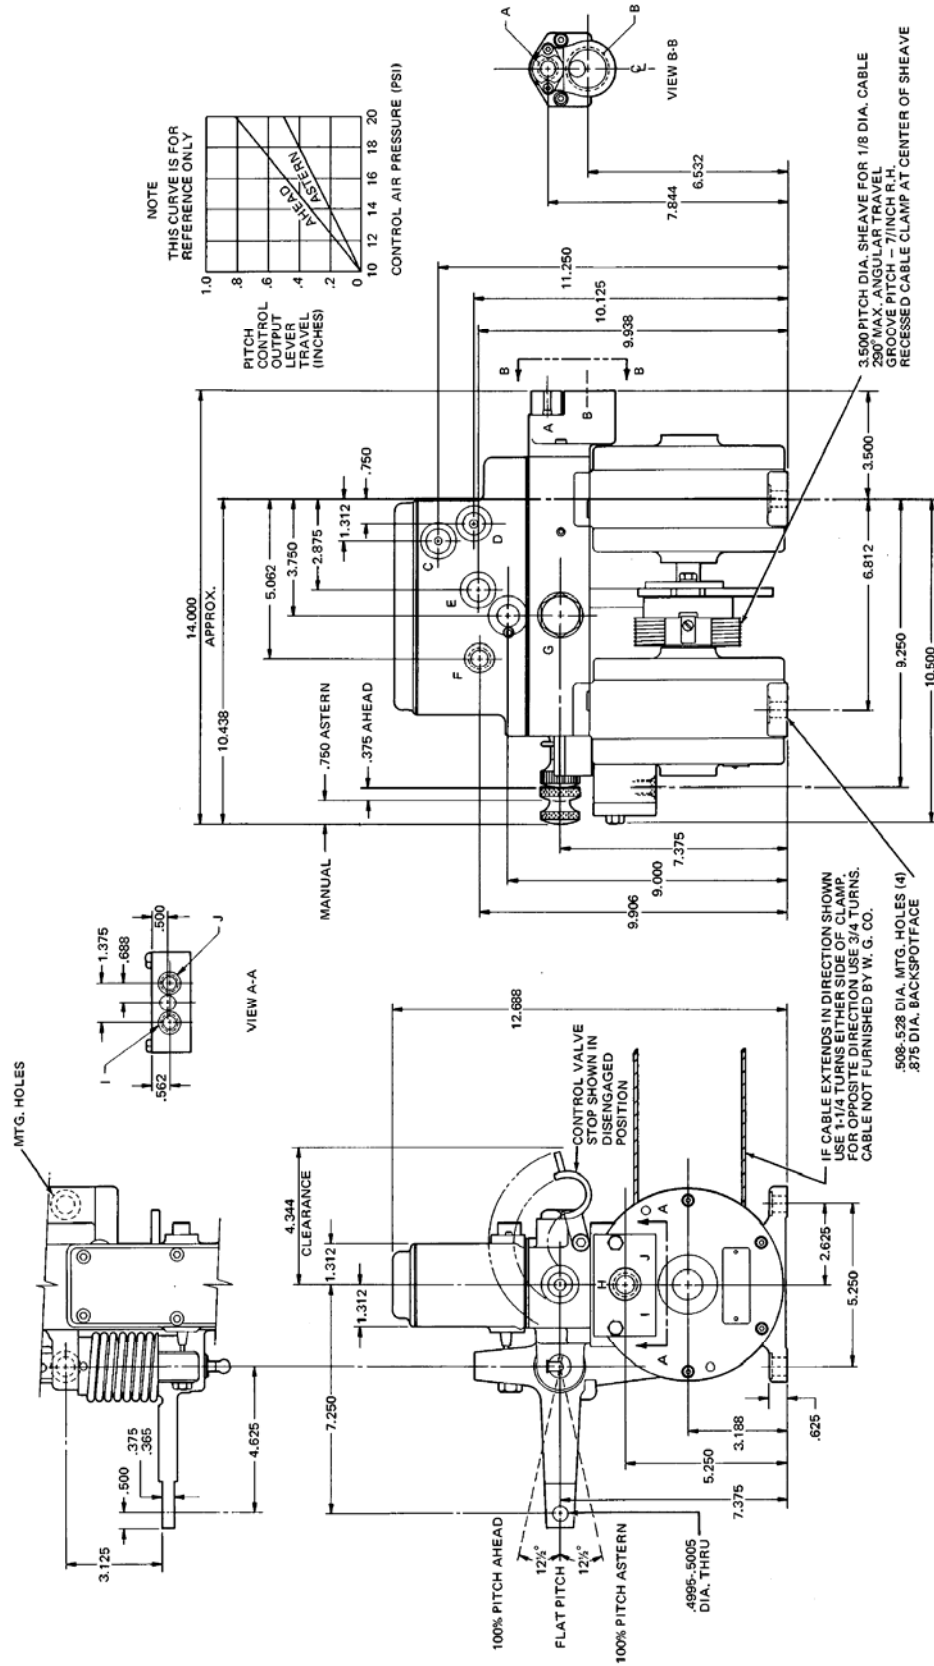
Pitch Control Assembly Parts (2 of 2)
